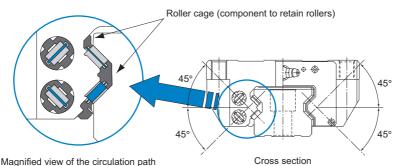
Structural Drawing of the Caged Roller LM Guide Model SRG
